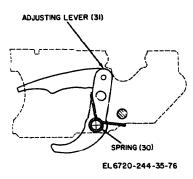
Spring location (spring (SO) from fig. 3-11).
